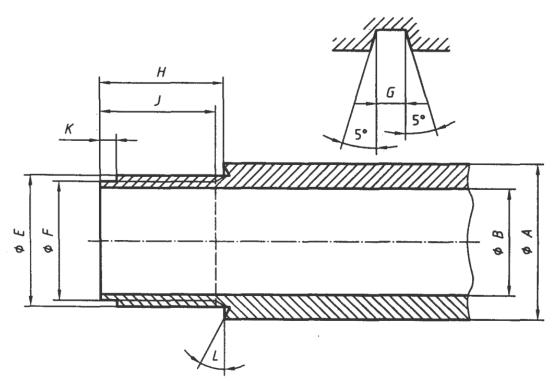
WIRELINE CORE BARREL OUTER TUBE (LOWER END)
